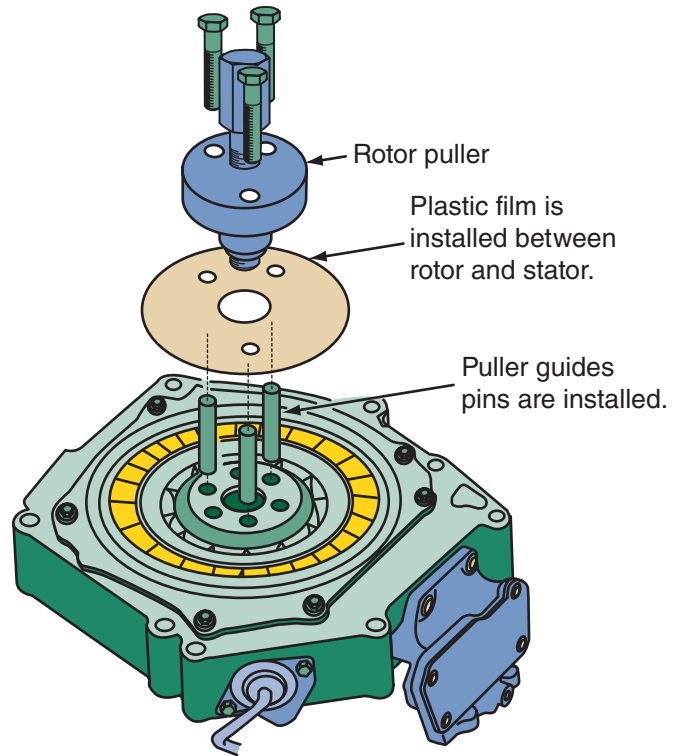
The special tools required to remove and install the rotor in a Honda hybrid.
